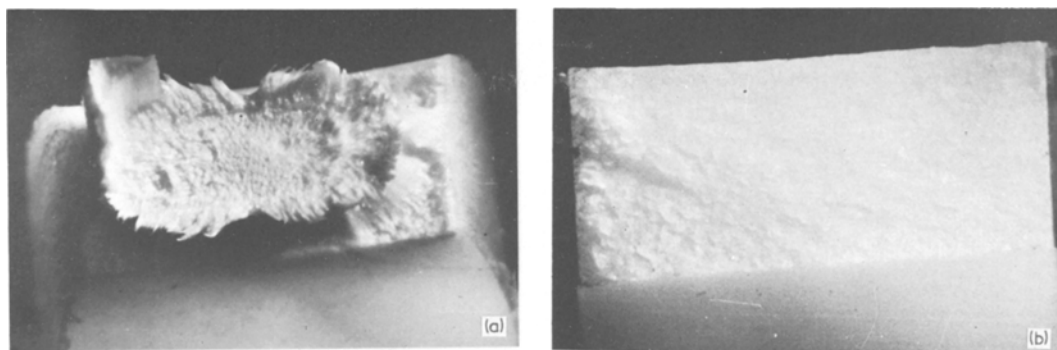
(a) Photograph of the fracture surface from a rapidly cooled compression-moulded specimen of HDPE 3 tested at 293 K. The cross-head speed was 750 mm min^{-1} . (b) Photograph of the fracture surface from a slowly crystallized compression-moulded specimen of HDPE 3 tested at 293 K. The cross-head speed was 0.05 mm min^{-1} .
